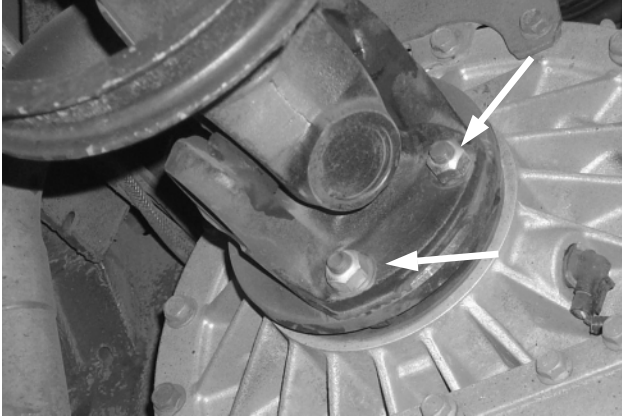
Propeller shaft mounting bolts (2 of 4 shown)
